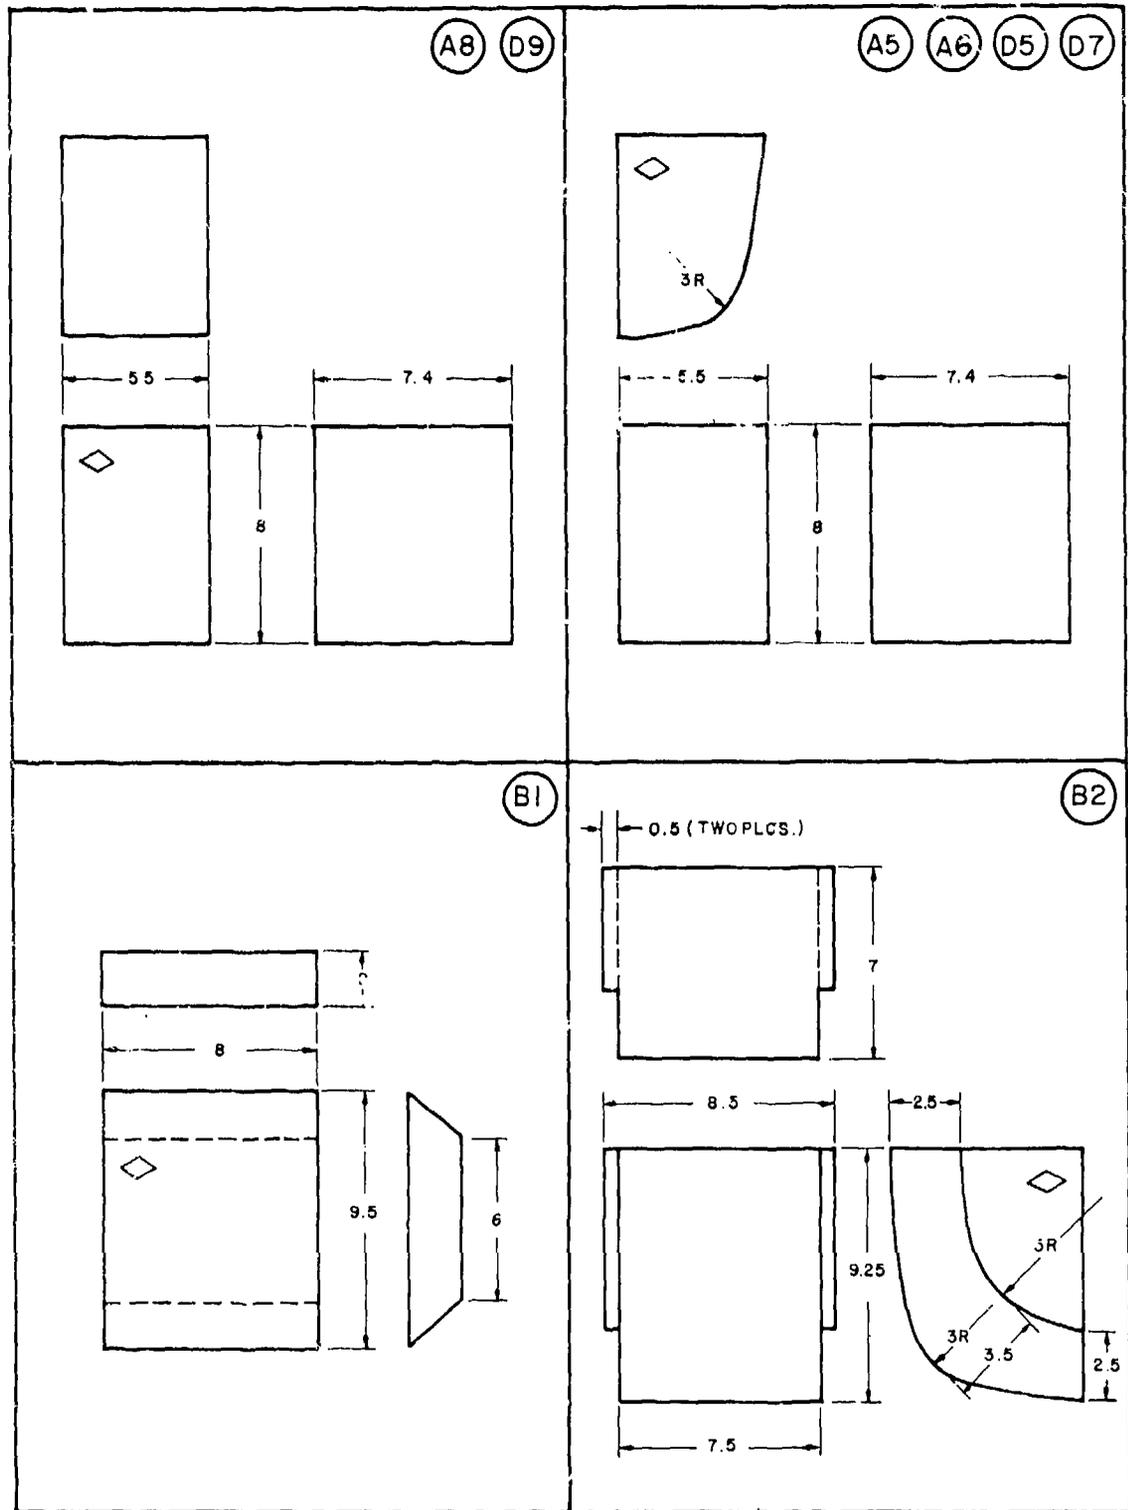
Batt Details, CF-104 Ammunition Compartment Tank
